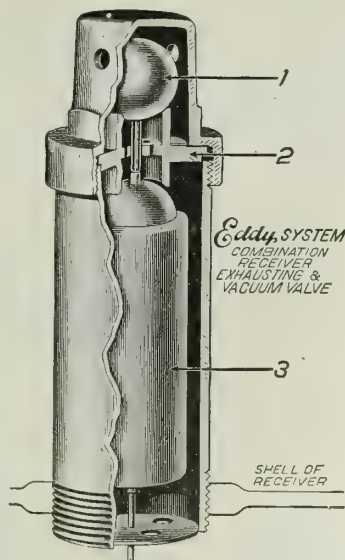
COMBINATION RECEIVER, EXHAUSTING AND VACUUM VALVE
